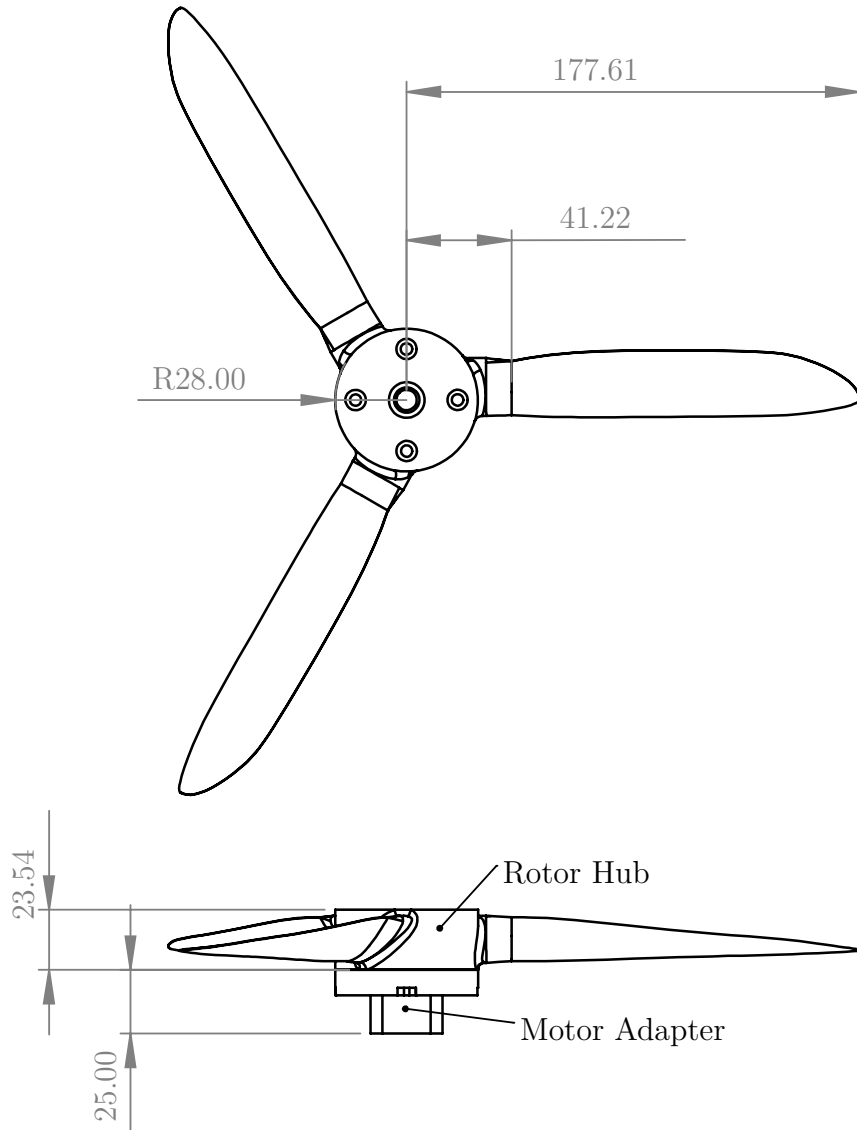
CAD drawing of the stainless-steel rotor assembly showing axial and edgewise views, including the motor mounting adapter used for the compressed-air experiments. All dimensions are in mm.
